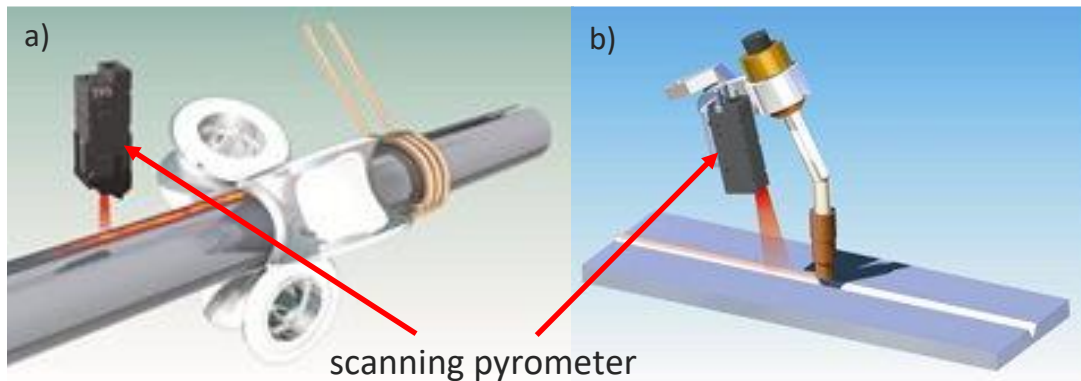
Scanning pyrometer applications by HKS Prozesstechnik; a) High frequency induction welding; b) GMAW [17]
